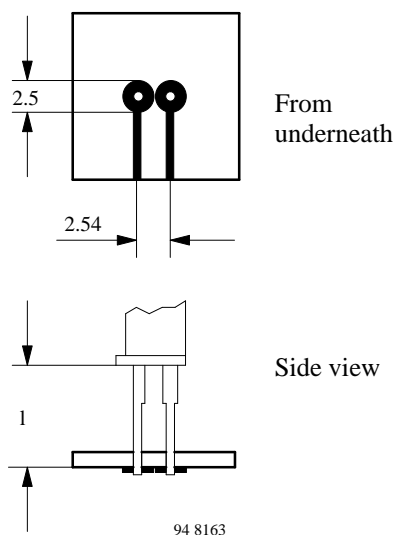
In the case of assembly on PC board, no heatsink (curve c, figure 62)
